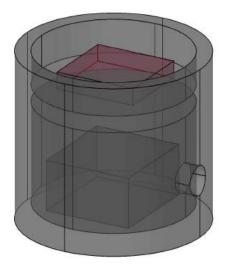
The casing of our project, the top box is a component that will hold the PCB and electronics. The large box on the bottom will be for all necessary power supplies.
